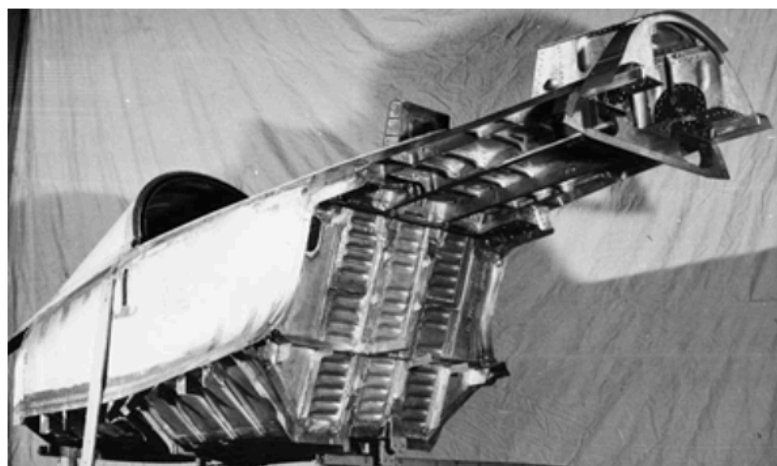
Welded pilot cabin for MiG-29M (68)
